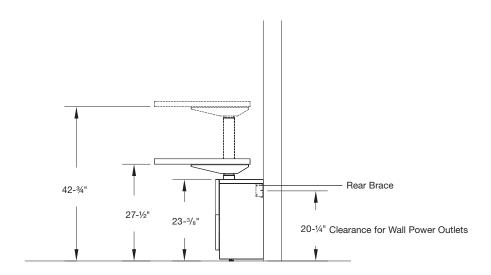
Wall Mounted Height Adjustable Table Upper and Lower Height Limits Shown with Wall Outlet Clearance
